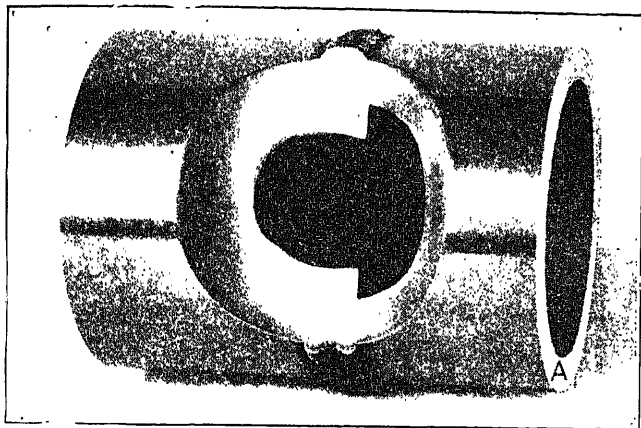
Piloted Cup Automatically Welded by Metallic-Electrode Arc Process to Tube to Form 75-MM. Shrapnel Shell.
